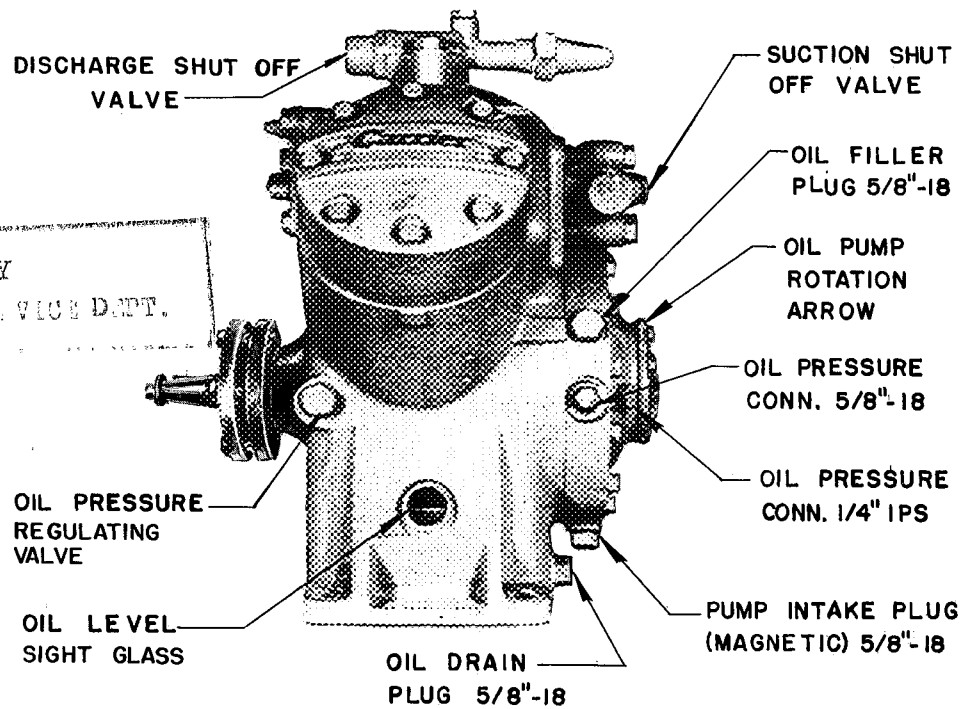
5F20 COMPRESSOR (SIDE AND PUMP END VIEW)
